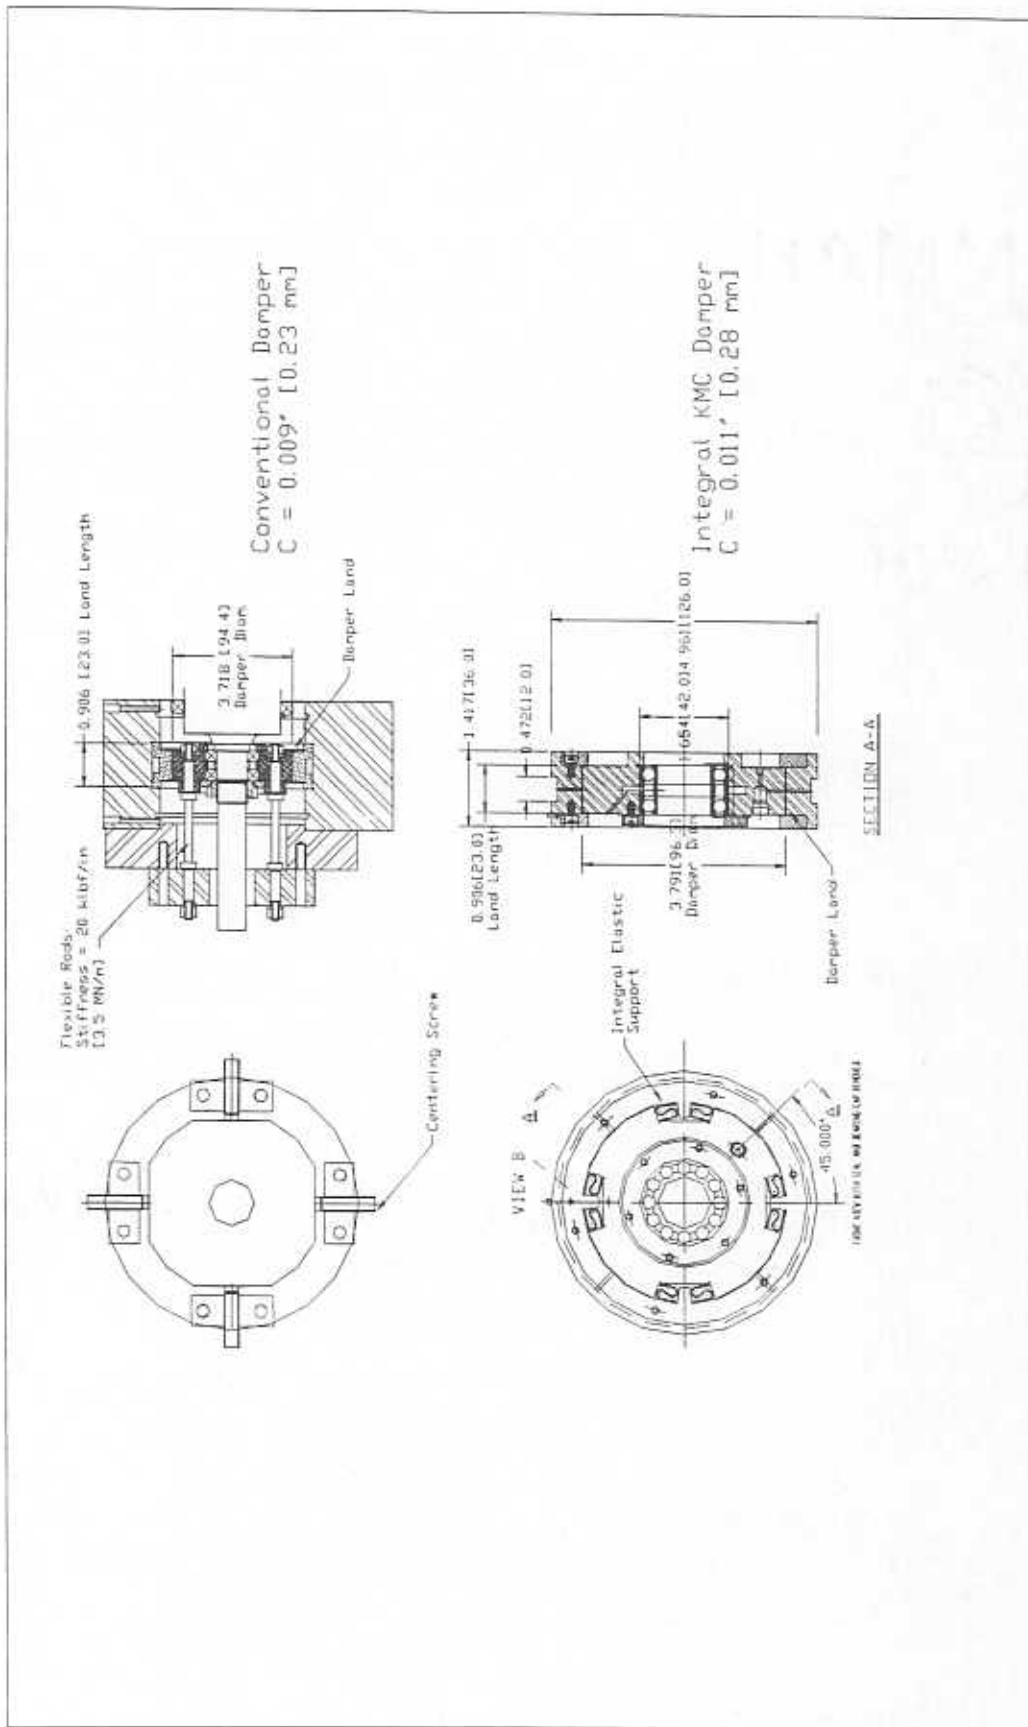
a) Conventional Cylindrical Squeeze Film Damper and elastic support
